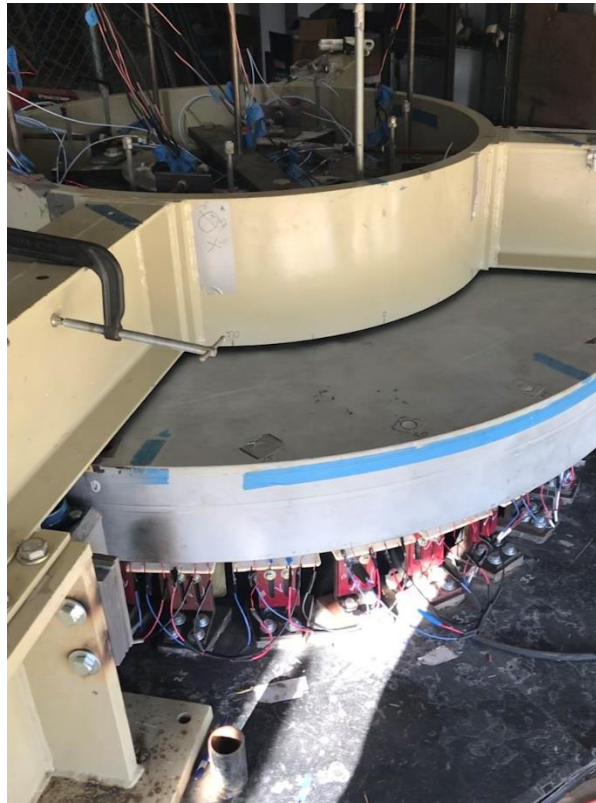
Coil Holder Assemblies Installed Underneath the Flywheel.
